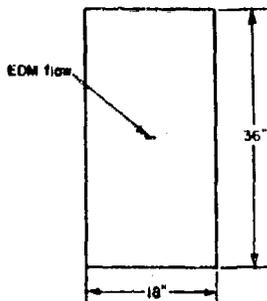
SHEET FRACTURE TOUGHNESS SPECIMEN
